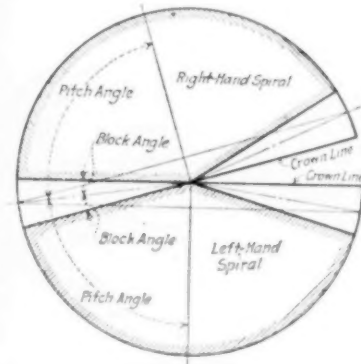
ENGAGEMENT OF THE MOLDING CROWN GEARS
